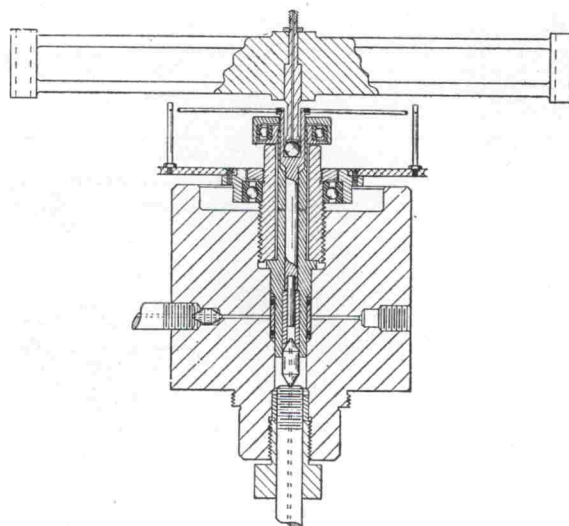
Sectional view of N.B.S. controlled-clearance piston gauge showing jacket for application of hydraulic pressure to control clearance, and arrangement for application of weight load to the piston
